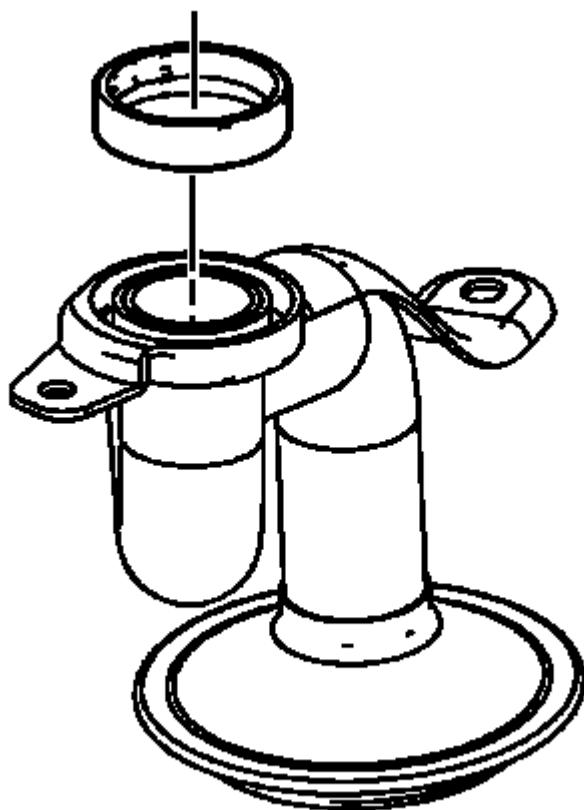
View Of Oil Suction Tube Seal & Oil Suction Tube
